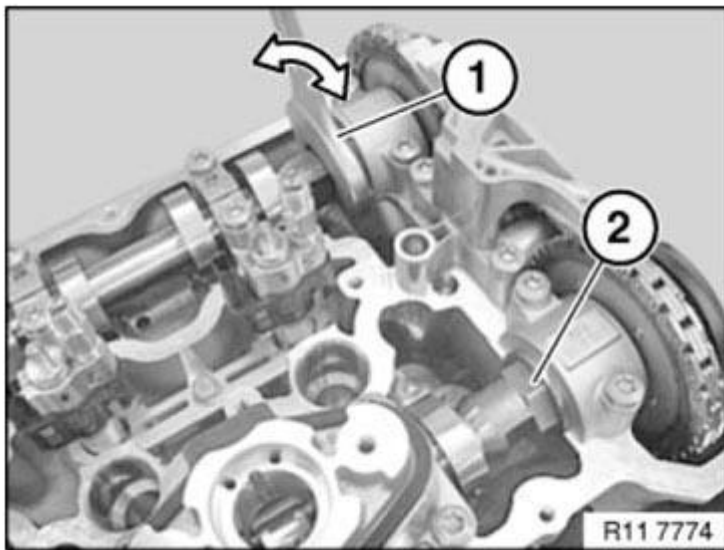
Gripping Hexagon Head Of Camshafts With Fork Wrench
